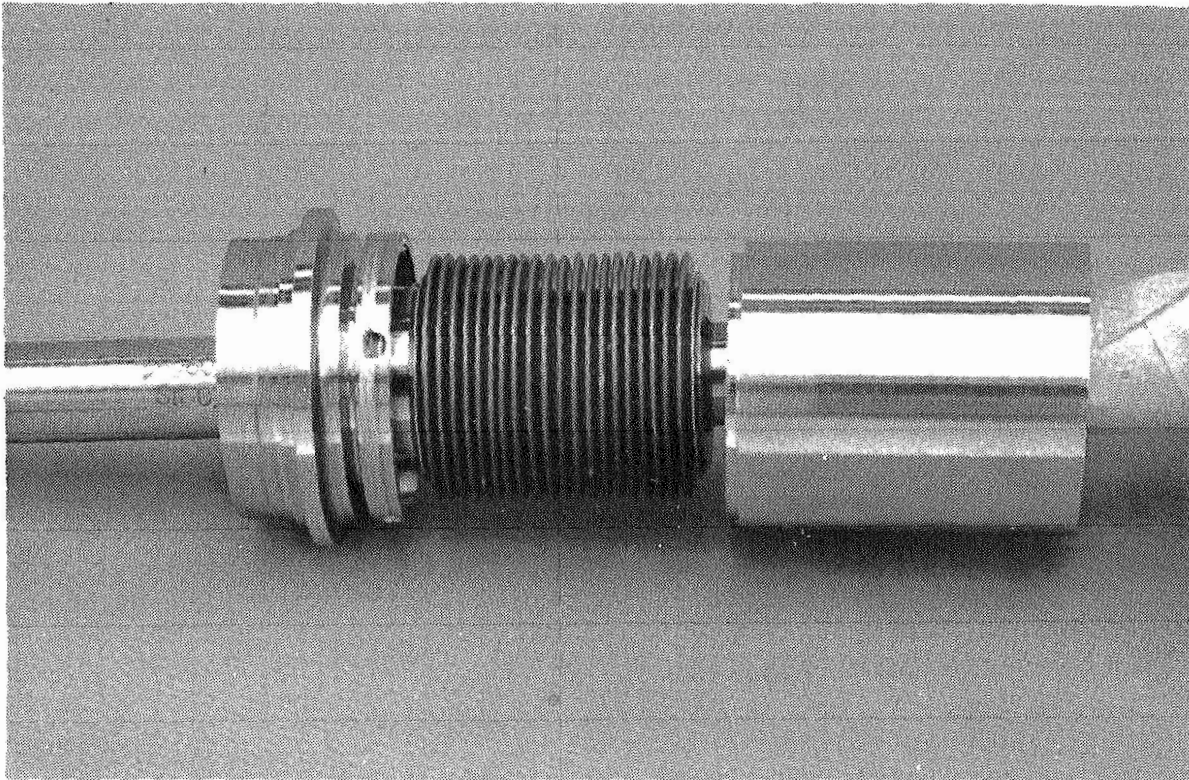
1 Valve Poppet-Shaft Bellows Seal Assembly (With Shield Removed) After Task III Testing
